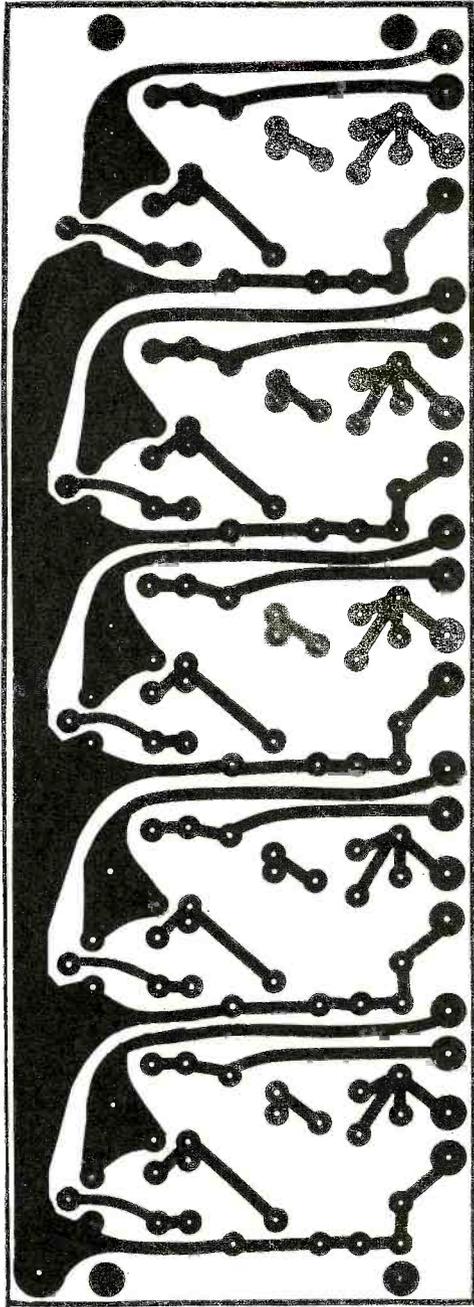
Actual-size illustration of printed circuit board. For hole drill sizes, refer to Fig. 4.
